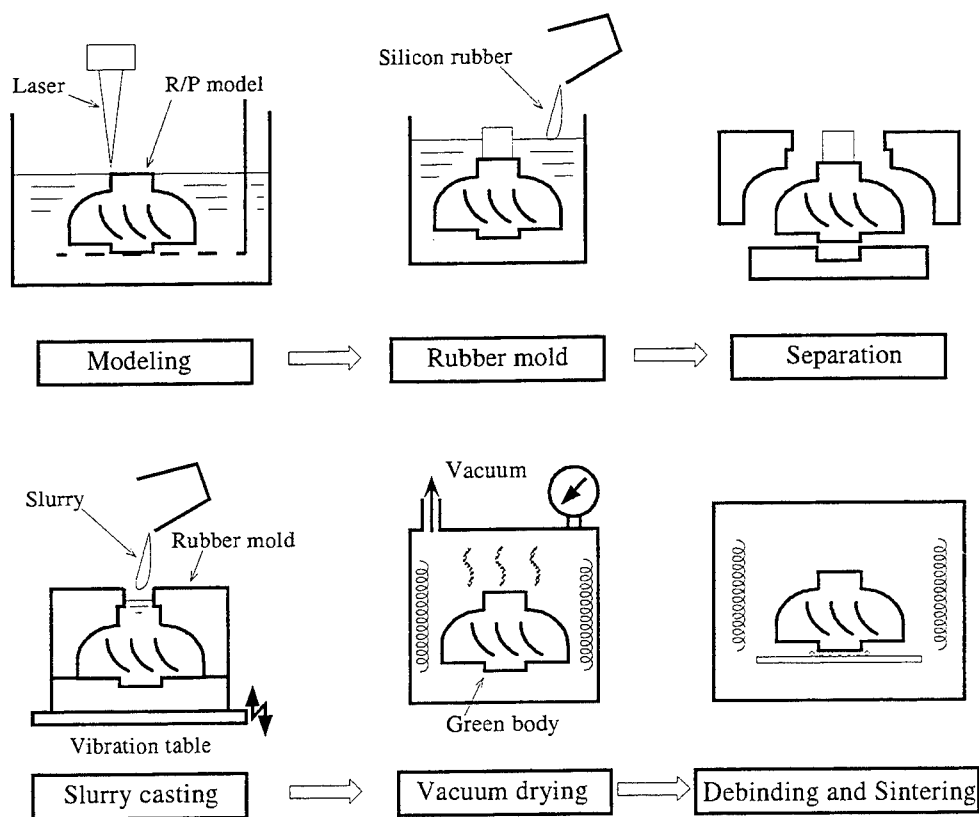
Forming process for slurry casting of fine ceramics using silicon rubber mold
